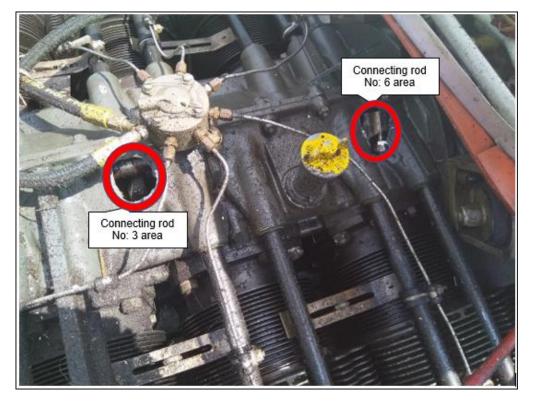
Orange circles show holes in the engine crankcase in the No.3 and No.6 cylinders.
